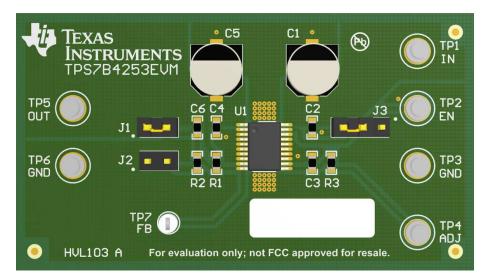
TPS7B4253-Q1 EVM Component Placement (Assembly Top View)
